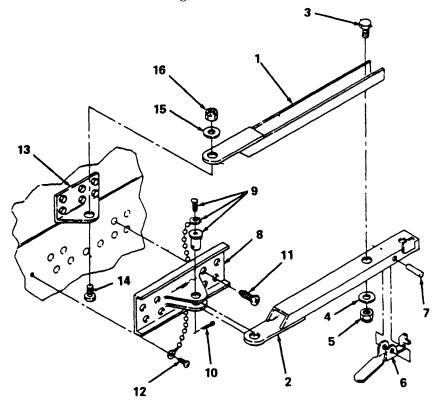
Door Brace Assembly Reassembly and Installation.
